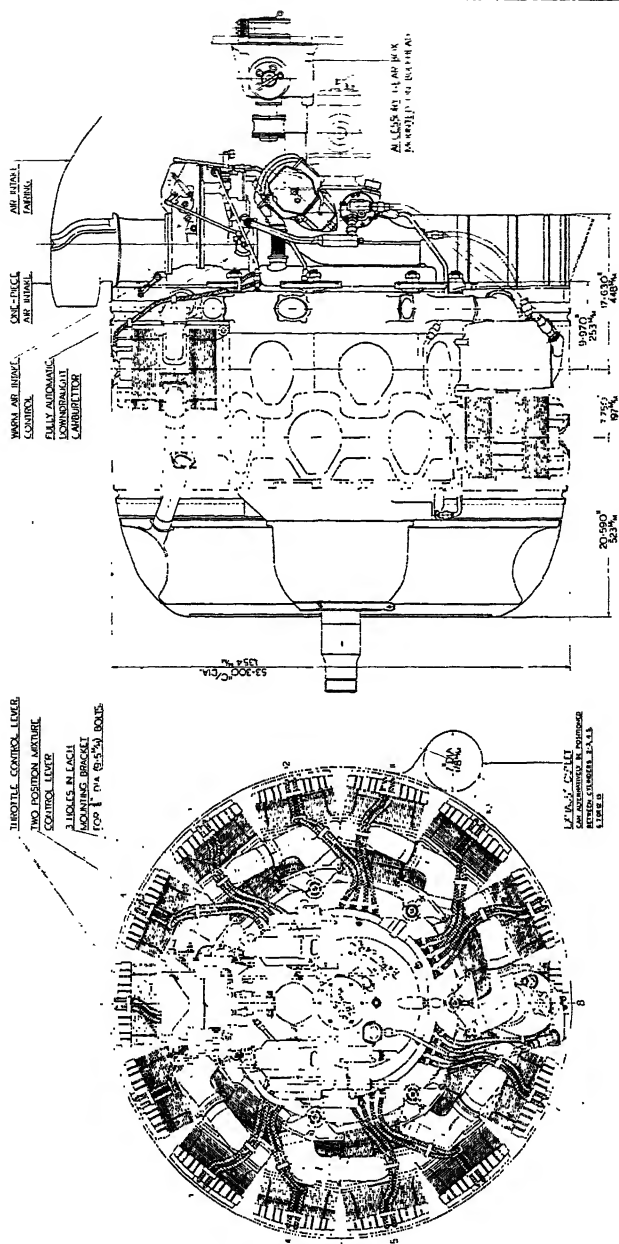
"HERCULES" ENGINE INSTALLATION DIAGRAM SHOWING ACCESSORY GEAR BOX
